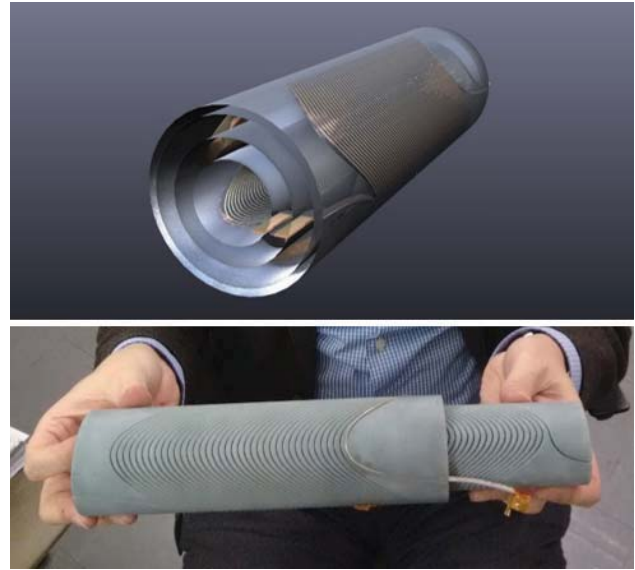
Prototype CCT final focus quadrupole. CAD drawing (top) and 3D printed item (bot).
